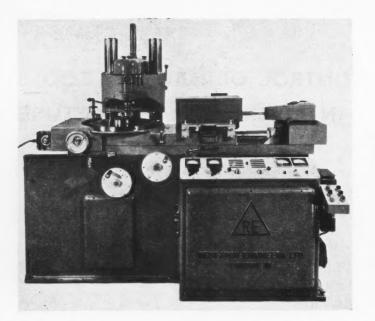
Modified Research Engineers Cam copying machine, fitted with numerical control.
